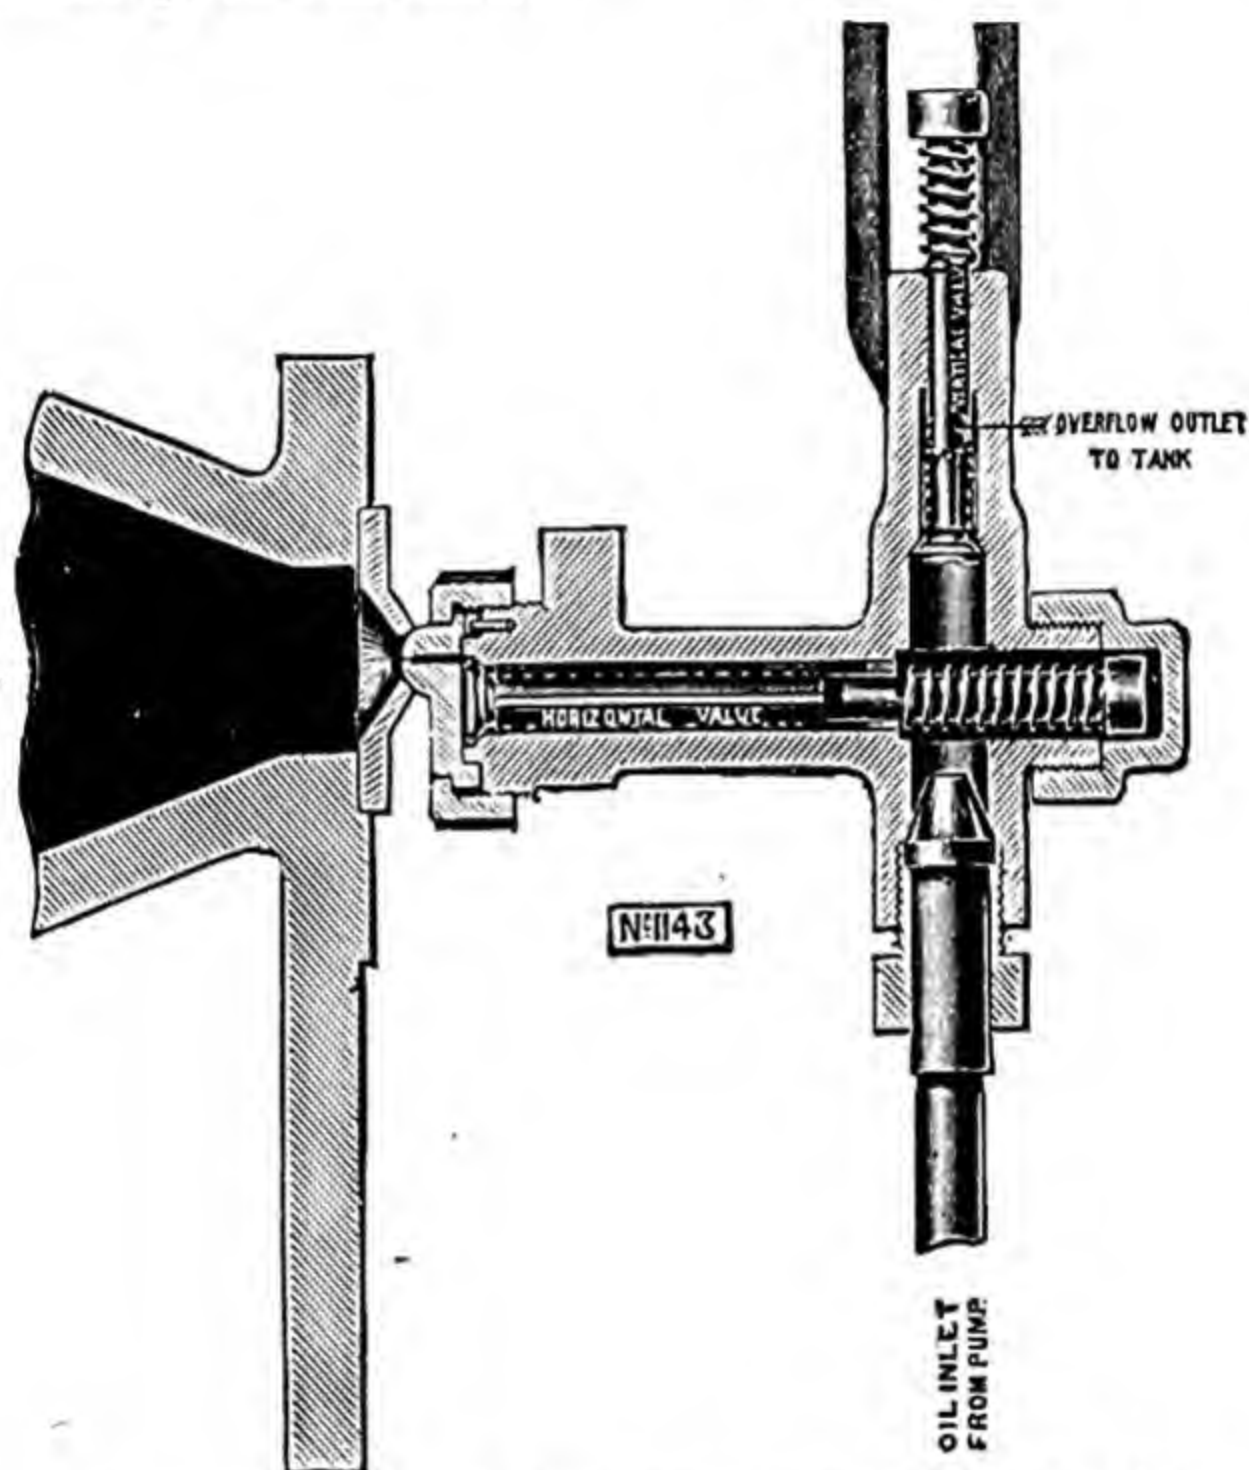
Vaporiser valve box of the Hornsby-Akroyd oil engine.
